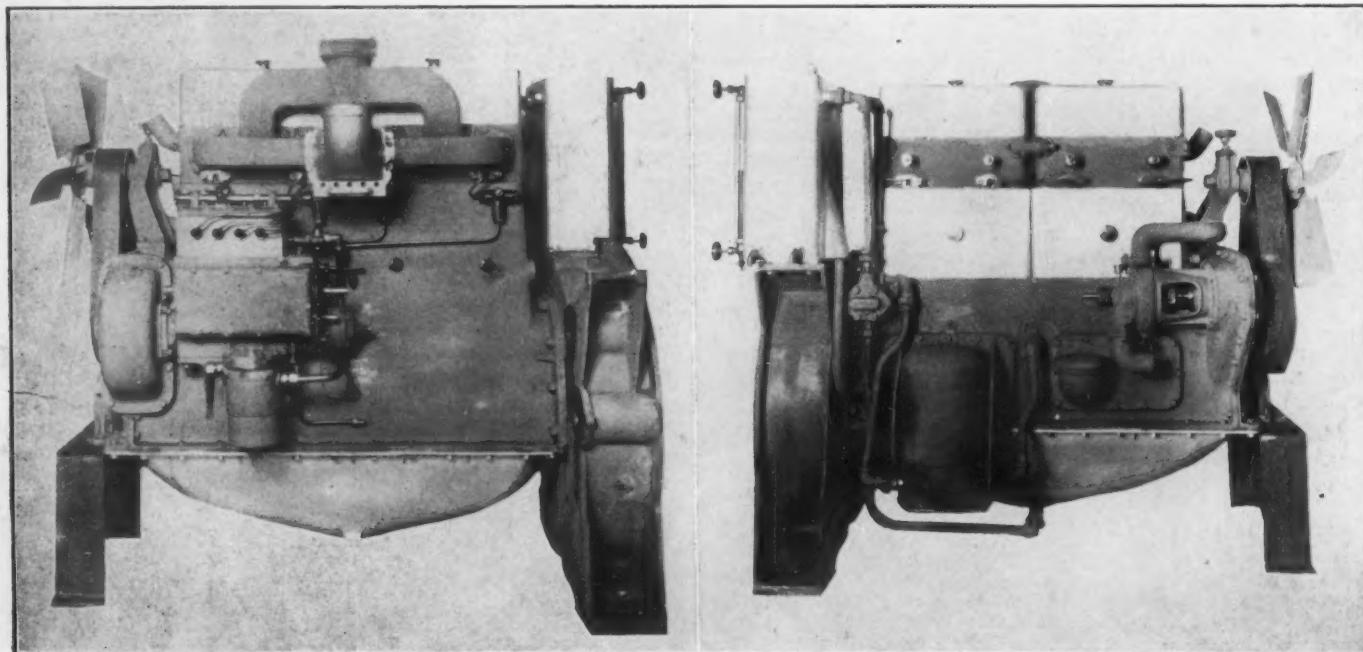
AMERICAN-BUILT FULL-DIESEL ENGINE
